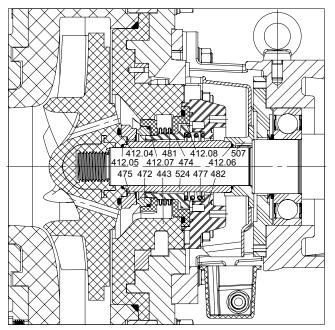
Single-acting mechanical seal with PTFE bellows, version internal flushing
